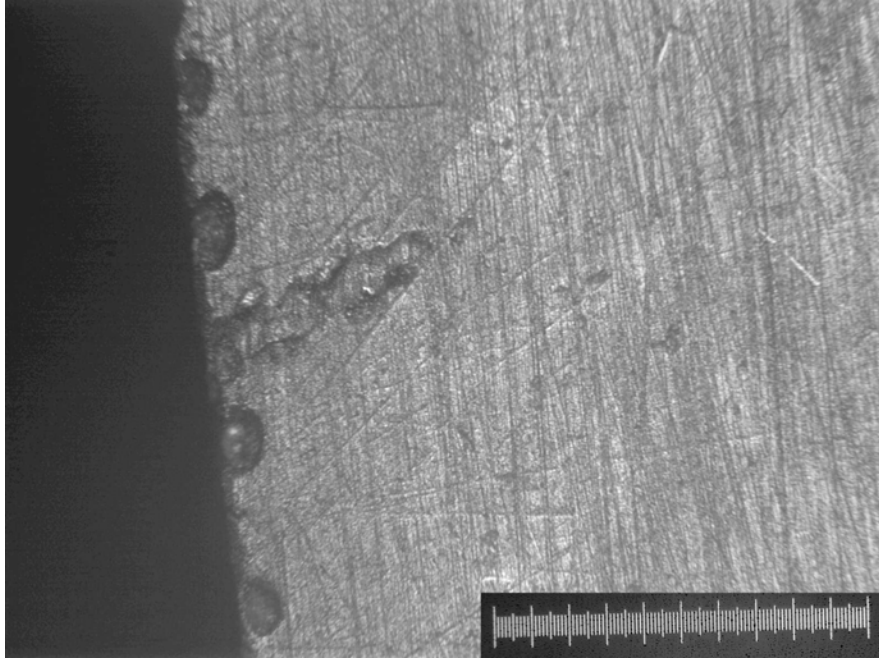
Microstructure of advanced machined process specimen#6 showing the defects caused by milling process at magnification 100x at location #5 on the surface
